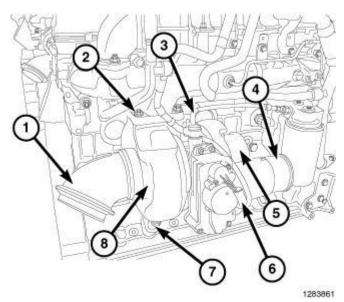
Turbocharger Components Courtesy of CHRYSLER GROUP, LLC
